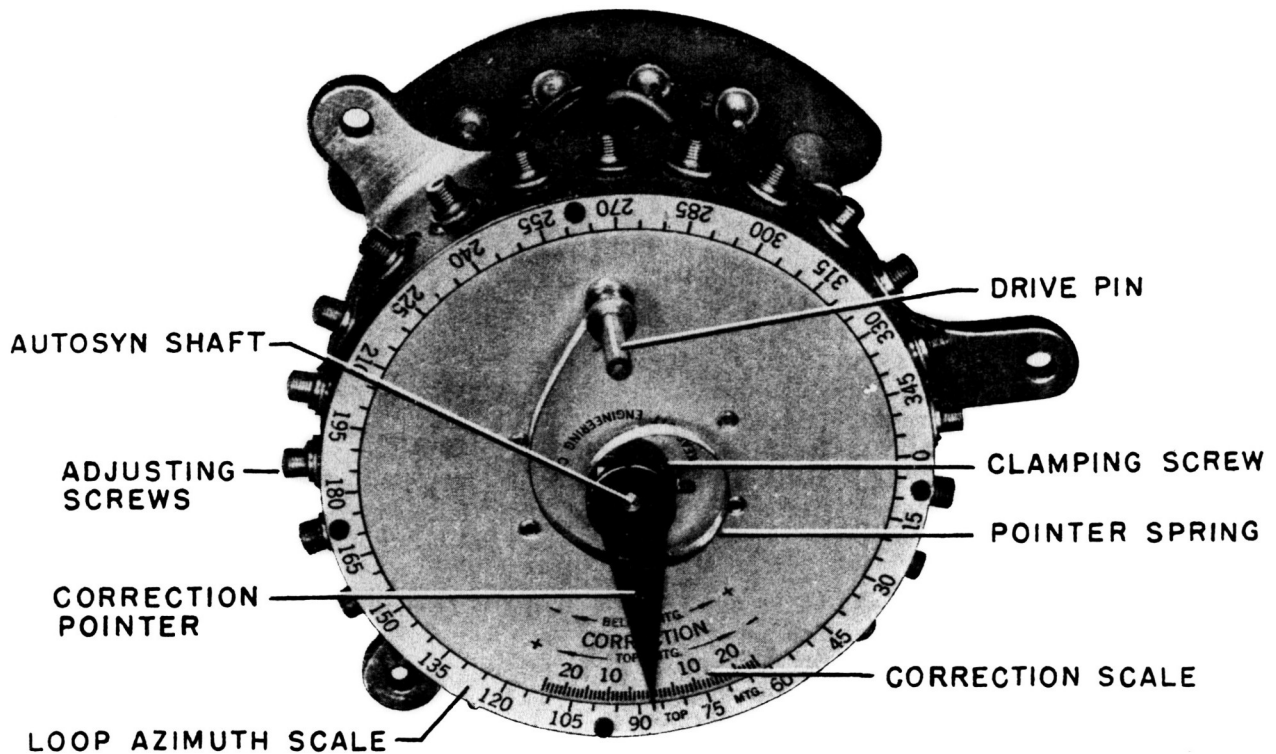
LOOP COMPENSATOR ASSEMBLY, FRONT VIEW
